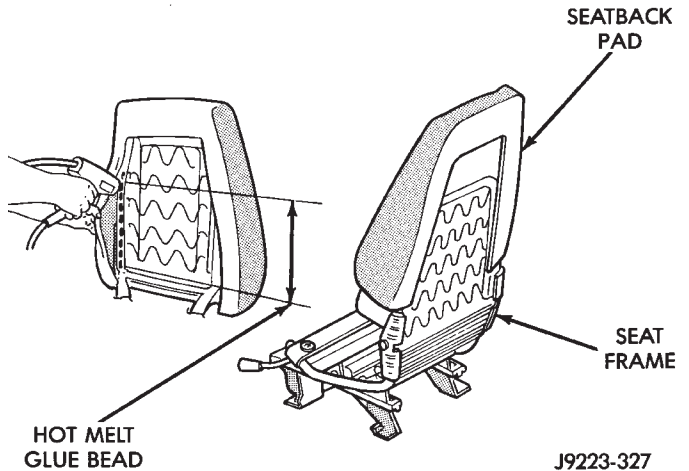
Side Panel (Wing) Pad Installation—Wingback Seat
